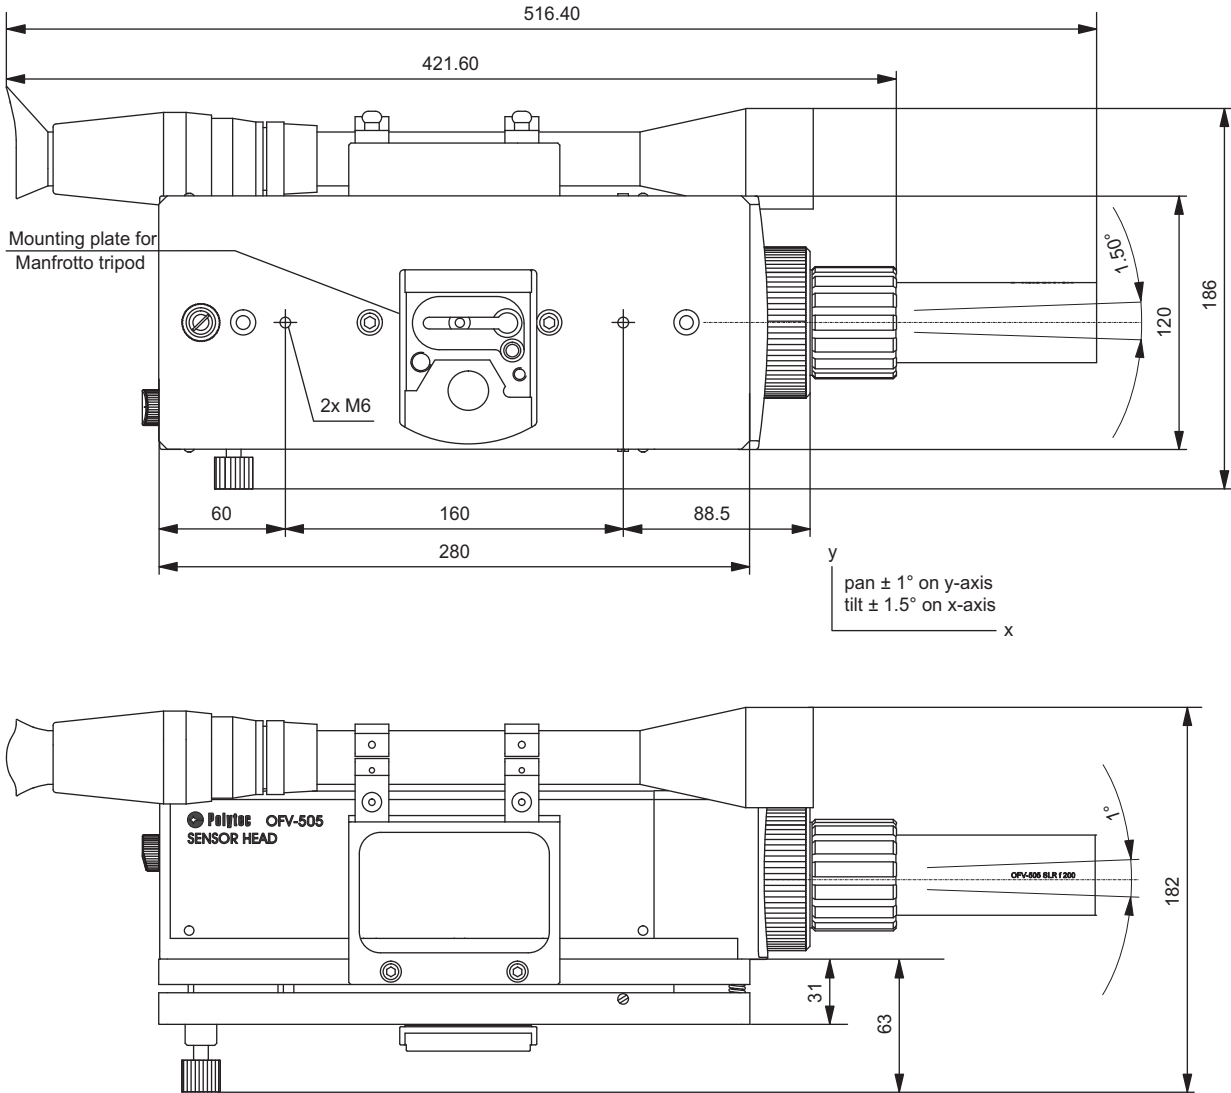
Bottom view and side view of the VIB-A-P05 with fitted targeting telescope and sensor head (Dimensions not specified are given in mm)
